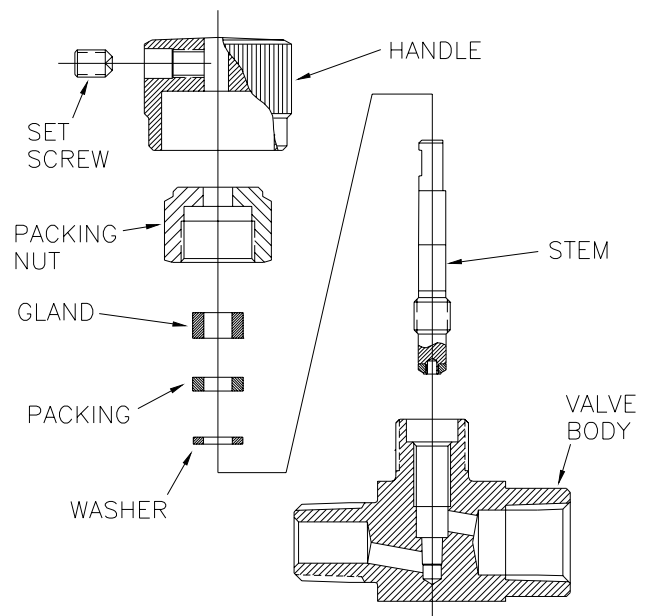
Bar Stock Needle Valve w/Grafoil® Packing Exploded View
